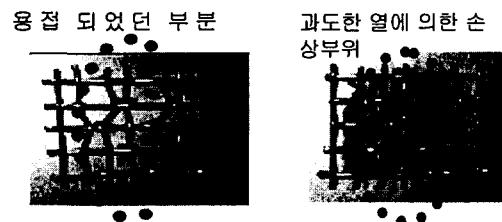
Inner structure after peel test (left : welding time: 1.5cycle , right : welding time: 7.5cycle)
